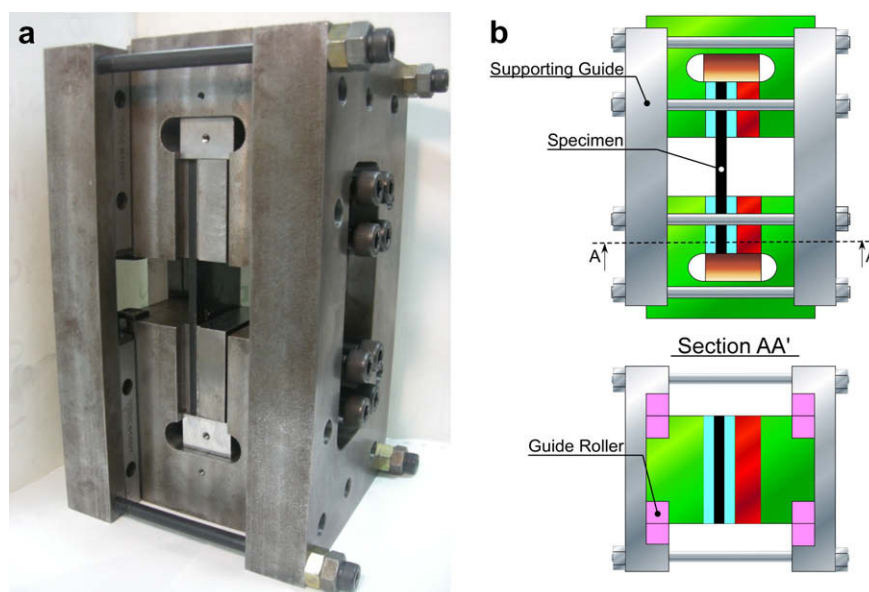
Compression test fixture: (a) Actual and (b) schematic.
